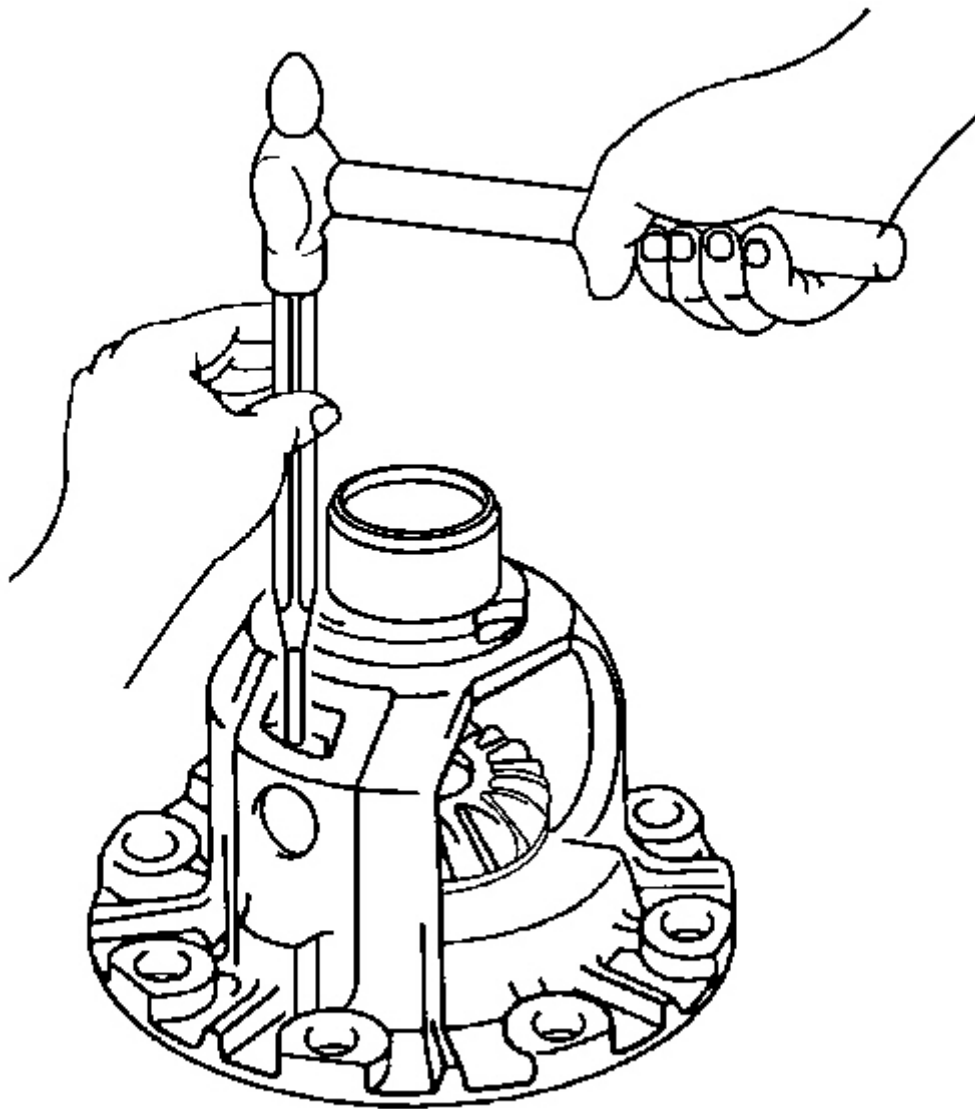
Driving Pin From Ring Gear Side Using A Pin Punch & Hammer
